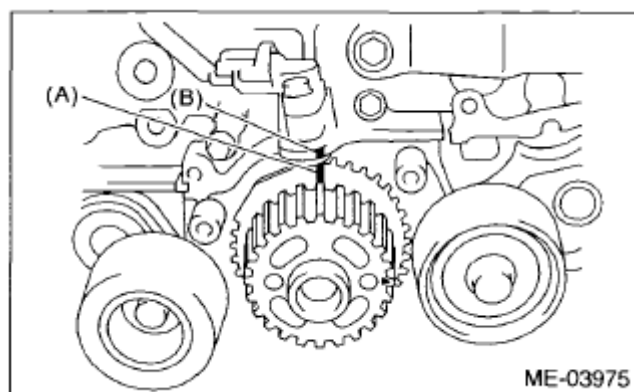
Identifying Alignment Mark On Oil Pump And Crank Sprocket
